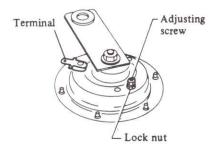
Adjusting screw on the horn (Sec 24)
